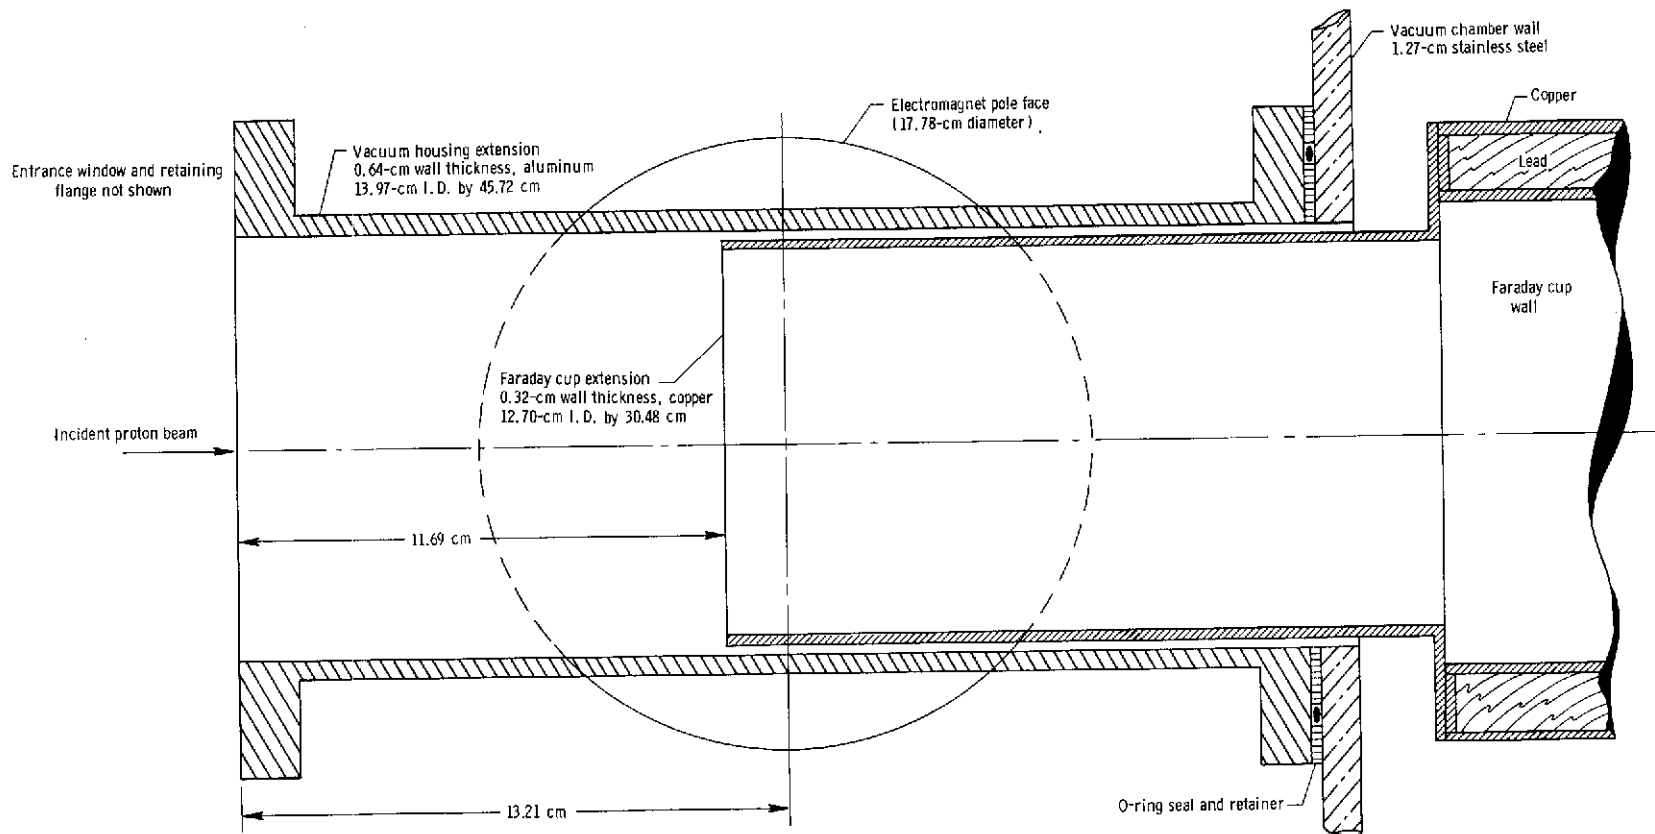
Faraday cup extension and location of electromagnet pole face.
